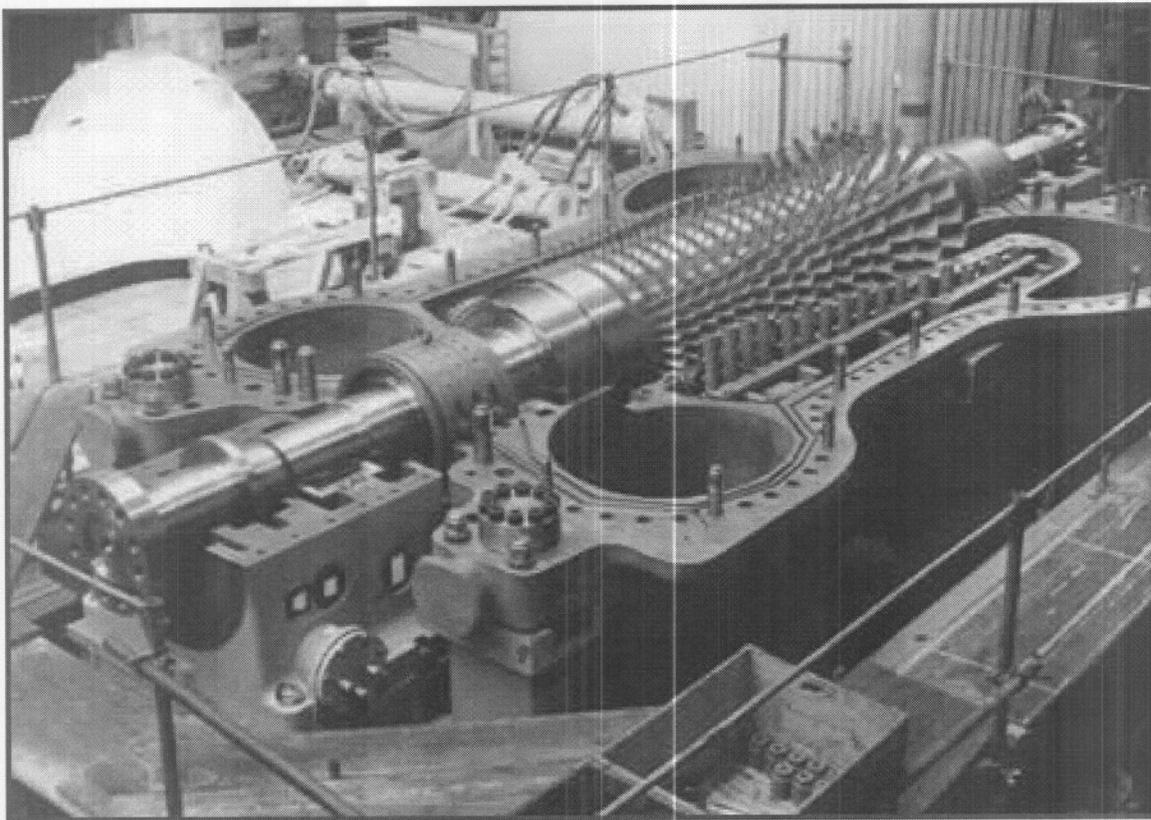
Axial compressor rotor. (Manturbo, 2006)
